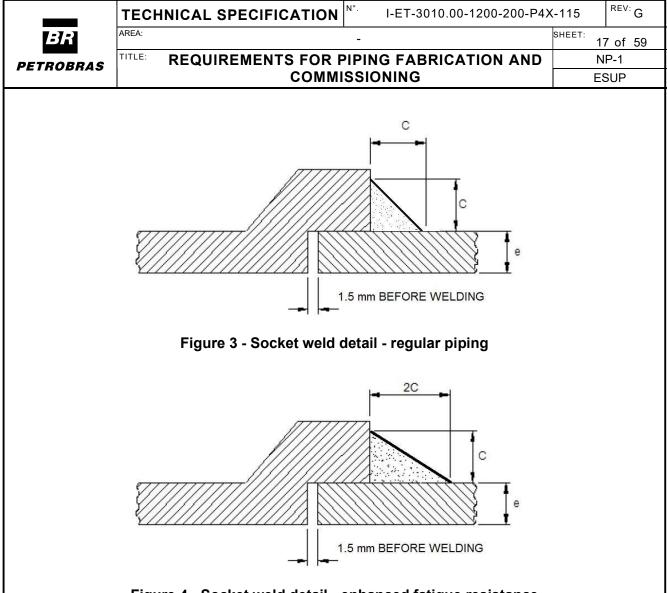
Socket weld detail - enhanced fatigue resistance
